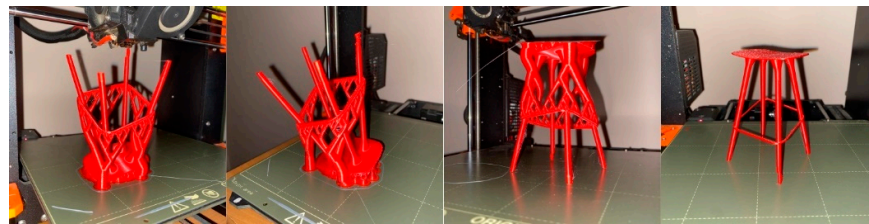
Chair miniature printed in a specific position which requires supports that are removed after the printing is finished. Designed and printed by the author of the paper.
